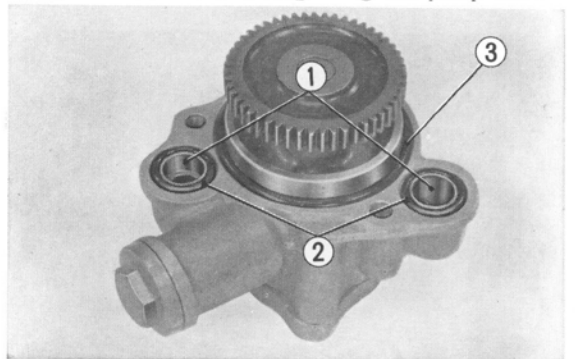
① O-ring collar ② 14 mm O-ring ③ 47 mm O-ring
